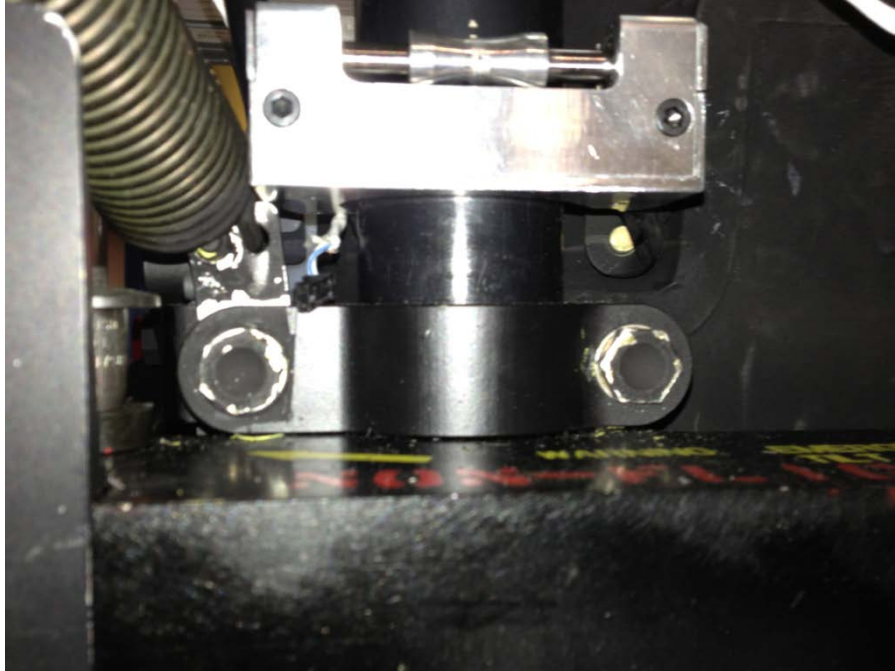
Upper Bracket - Armor Side - Armor Spring Bracket Clearance Issue
